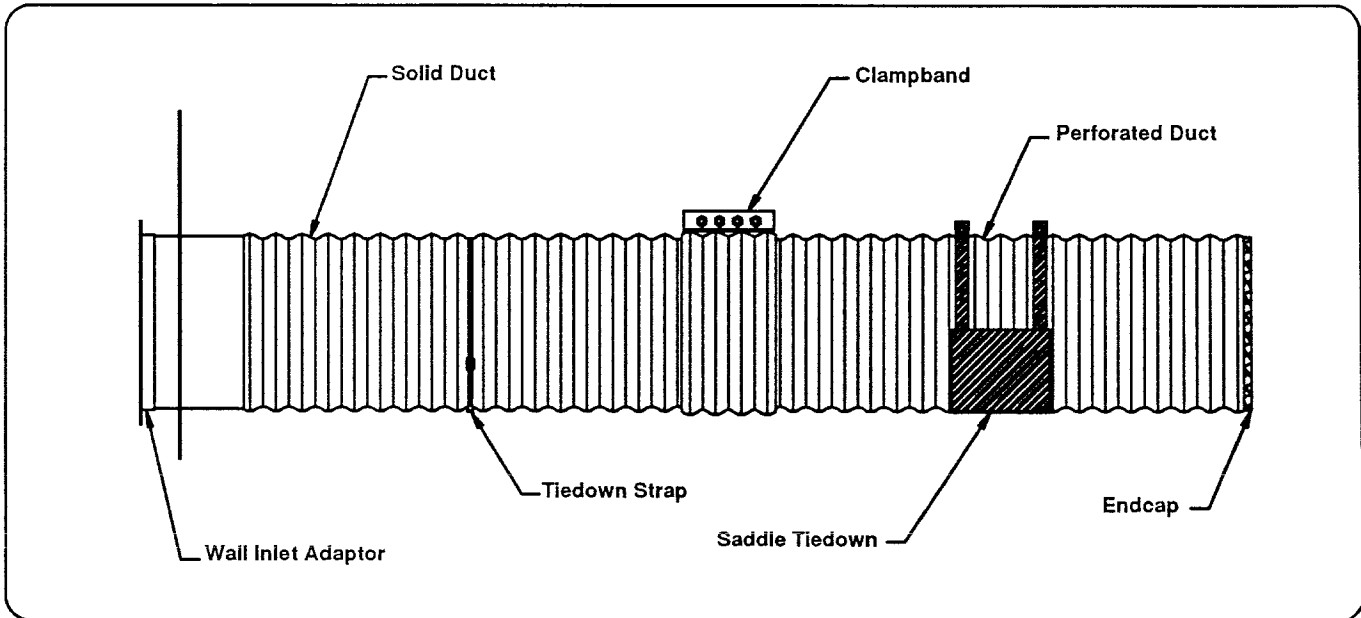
Typical Parts Used for Assembly on a Flat Surface
